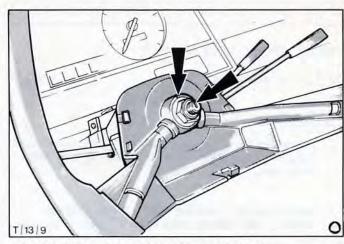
Centralise steering wheel shaft 12 o'clock position.
